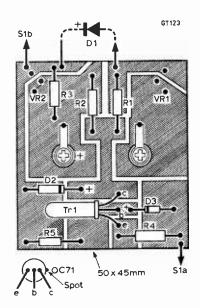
(above): Temperature probe housing cutting details. Fig. 3 (right): A suggested PCB layout. All components are mounted on the copper side of the board.
